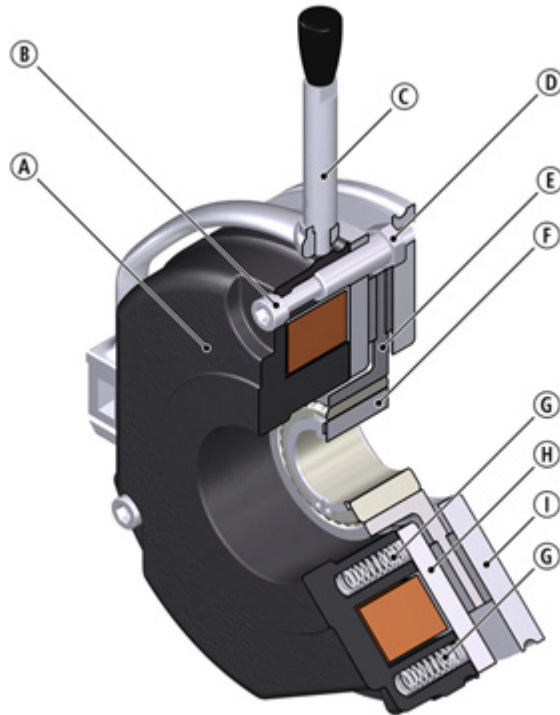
Design of the INTORQ BFK458 spring-applied brake: Basic module N (complete stator) + rotor + hub + flange
